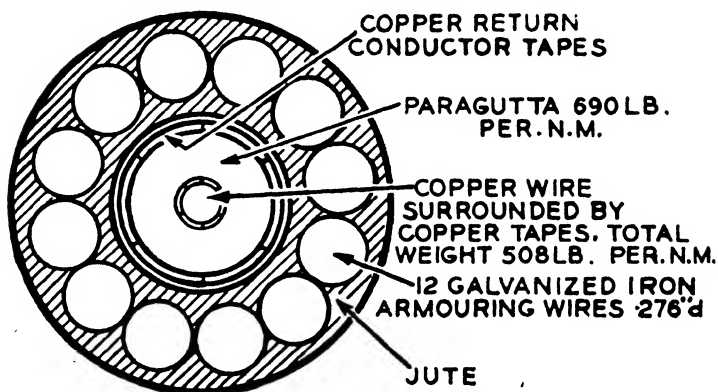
CROSS-SECTION OF CO-AXIAL SEA CABLE
